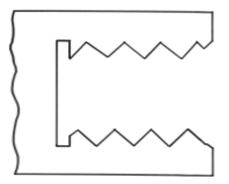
If you were to slice your newly cut threaded section into half, the threads should look something like this. Note that the recess allows the thread to be cut clean at the bottom of the hole.
